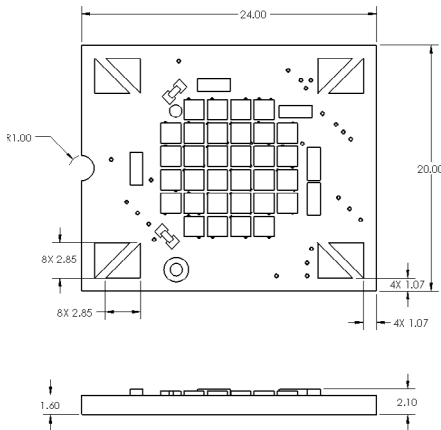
L501A-RGBxxyy Mechanical Drawing
